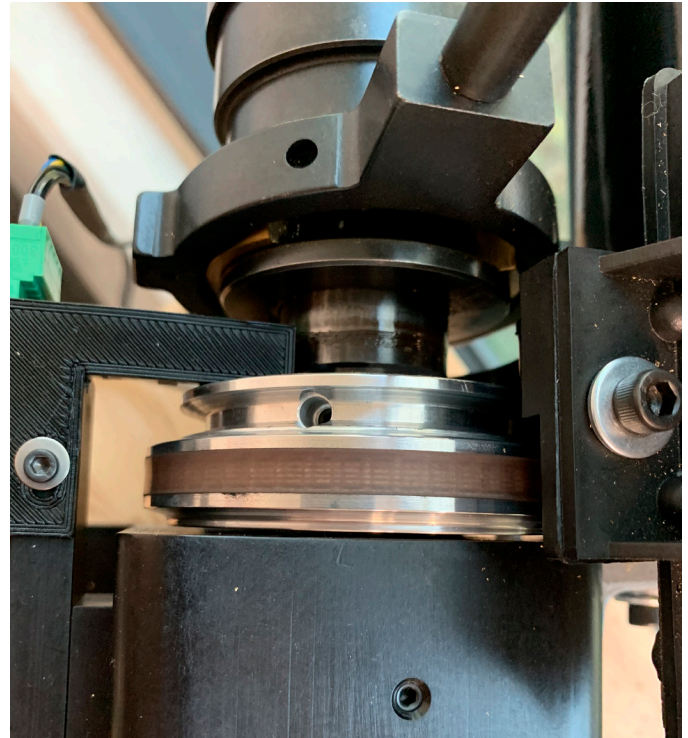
The V-belt is positioned in the high-torque, lower pulley groove.
